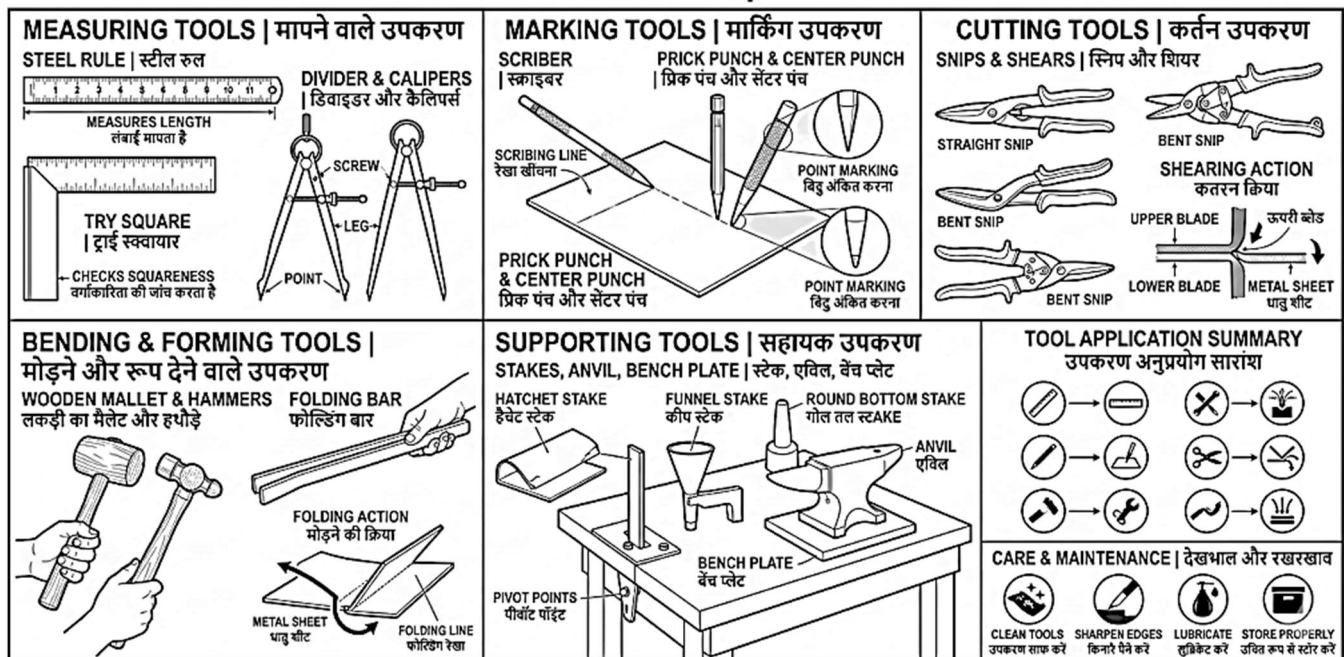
Sheet Metal Tools for Measuring, Marking, Cutting and Bending | मापन, अंकन, कटाई एवं मोड़ने हेतु शीट मेटल औजार
